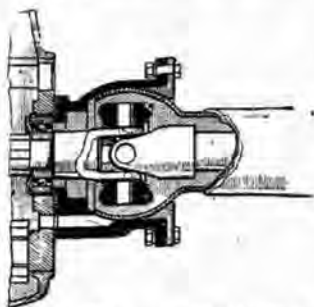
The universal joint is located within the ball joint of the torque tube at the rear of the gear box.
